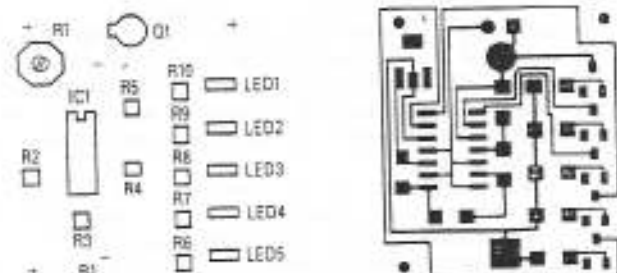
USE THIS LAYOUT *a* when building the circuit. The PC board is shown in *b*.
